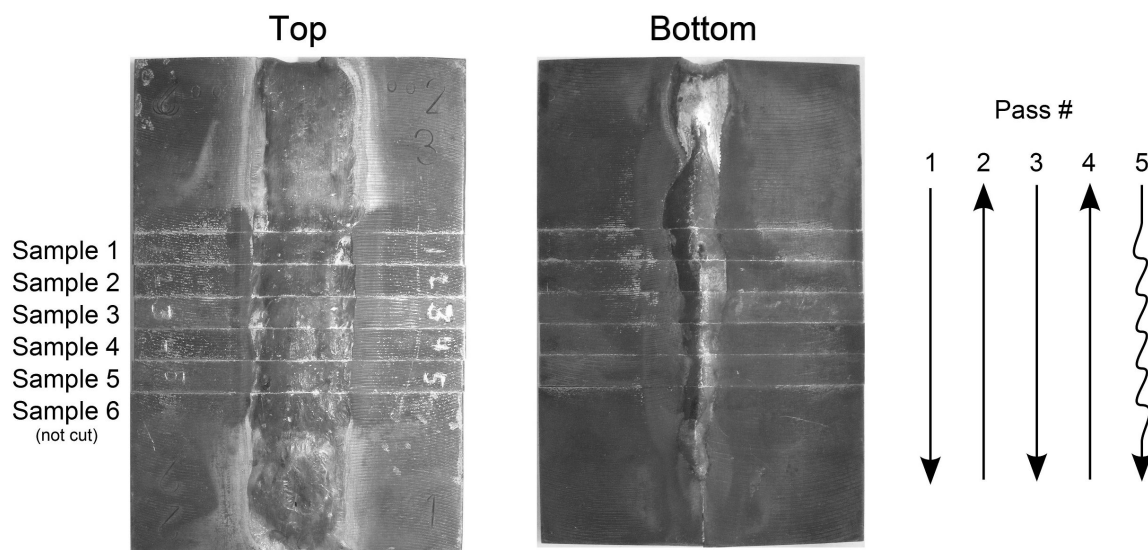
5-pass weld showing section locations and welding direction
